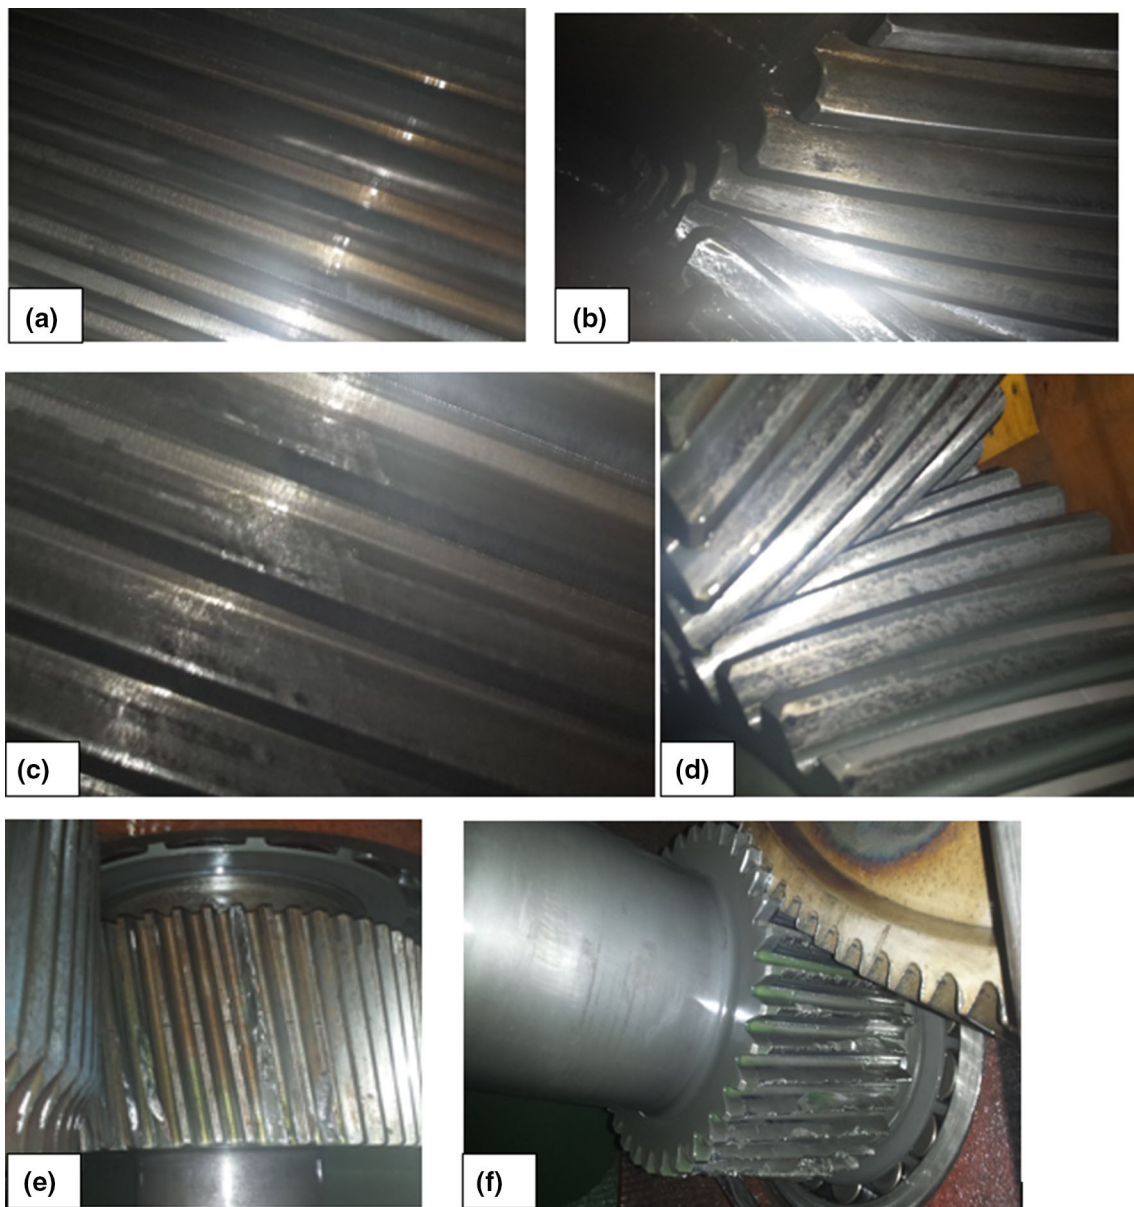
Gears progressive failure stages. (a) Stage I—minimum amount of wear signs on gear surface. (b–d) Stage II—pitting and wear at different surface areas (surface failure initiation). (e–f) Stage III—fracture and/or deformation of gear’s material
